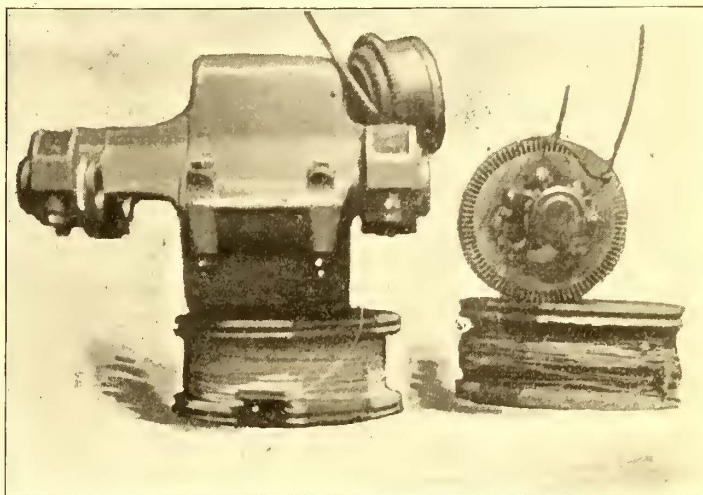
END VIEW OF ARMATURE AND MOTOR, SHOWING ONE COIL IN PLACE.
